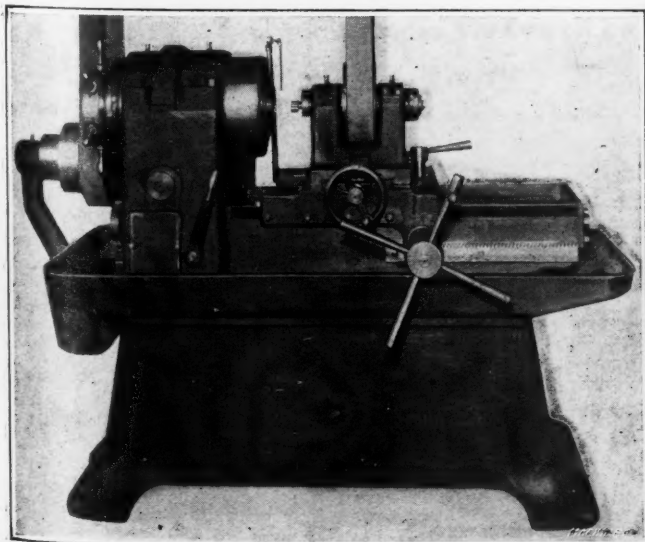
Machine built by the Biggs-Watterson Co. for milling Threads on Shells and Other Commercial Work
